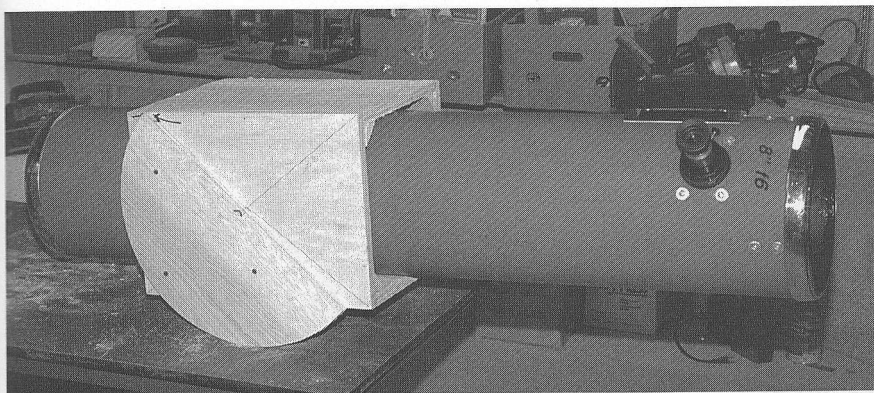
The optical tube assembly sits on your workbench balanced on the side bearings. When you complete the rocker and ground board, your telescope will be ready for a night under the stars.
